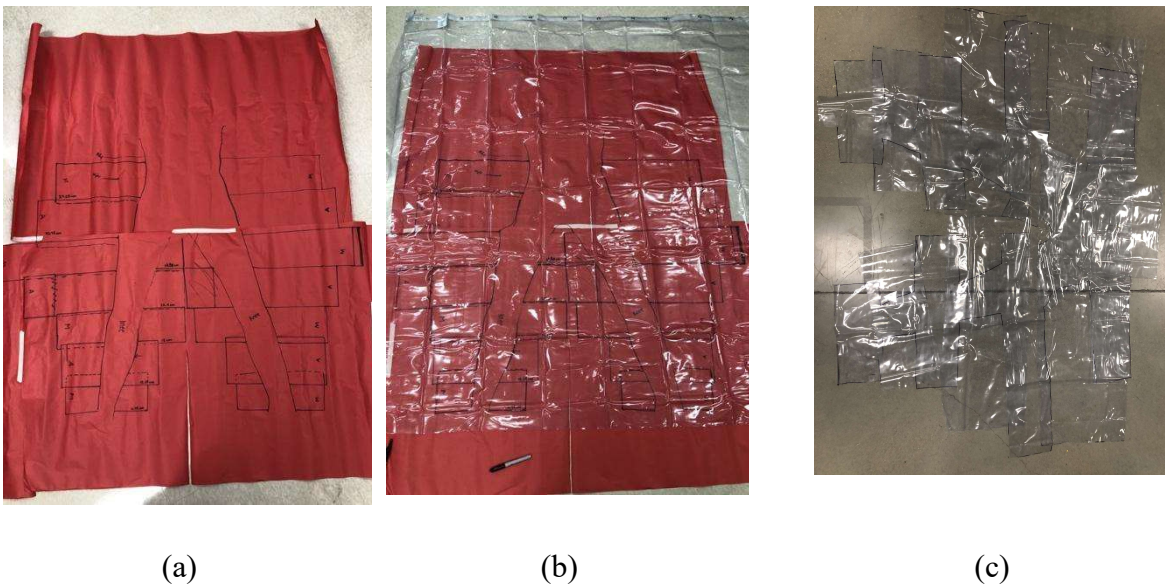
(a-c): (a) Traced Outline on Paper. (b) Traced Outline on 20 G PVC (c) Assembled and Tacked Prototype
